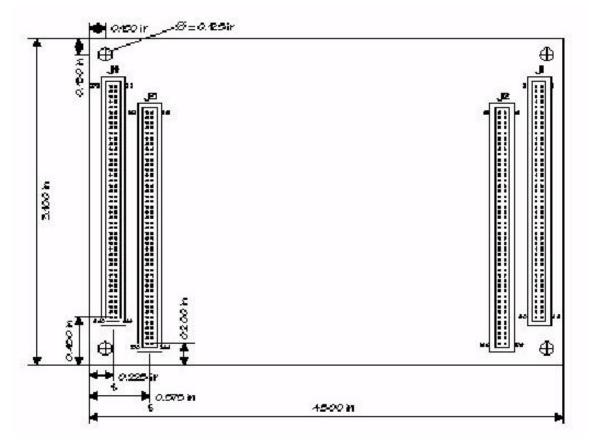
SHARCPAC Module Dimensions, Bottom View
